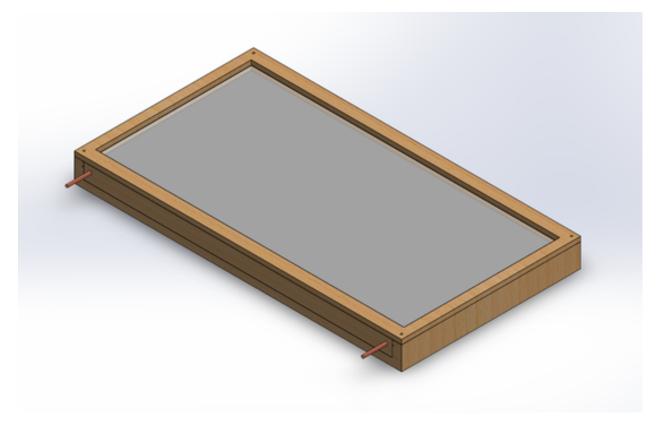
SOLIDWORKS Assembly of Solar Thermal Collector
